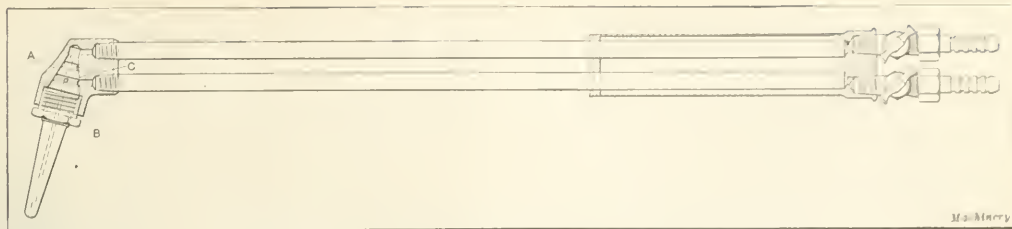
Standard Type Positive-pressure Welding Torch as made by the Davis-Bournville Co.
